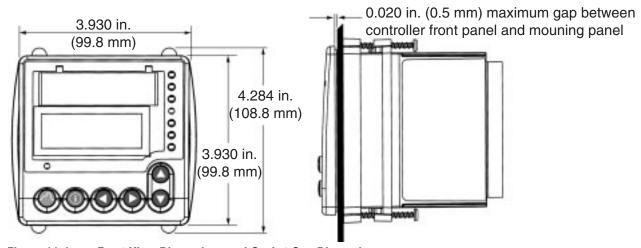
Front View Dimensions and Gasket Gap Dimension.
